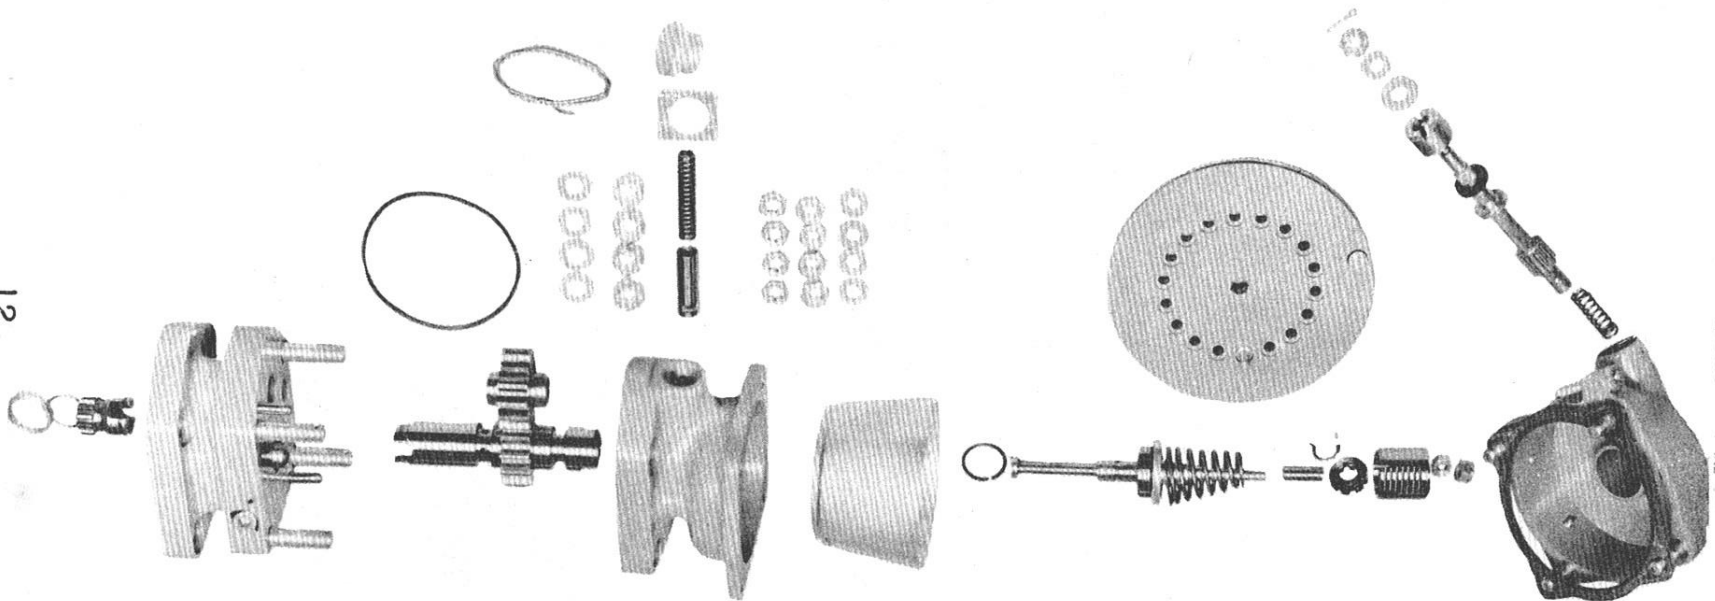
EXPLODED VIEW—GOVERNOR MODEL
